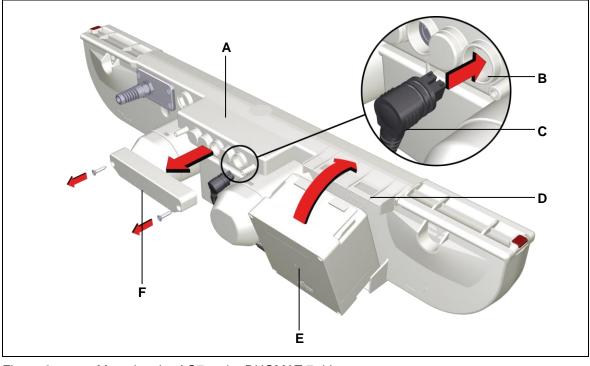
Mounting the AG7 to the DUOMAT 7 drive
